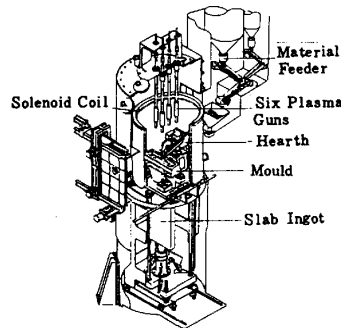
Schematic drawing of 2400KW vacuum plasma electron beam furnace
